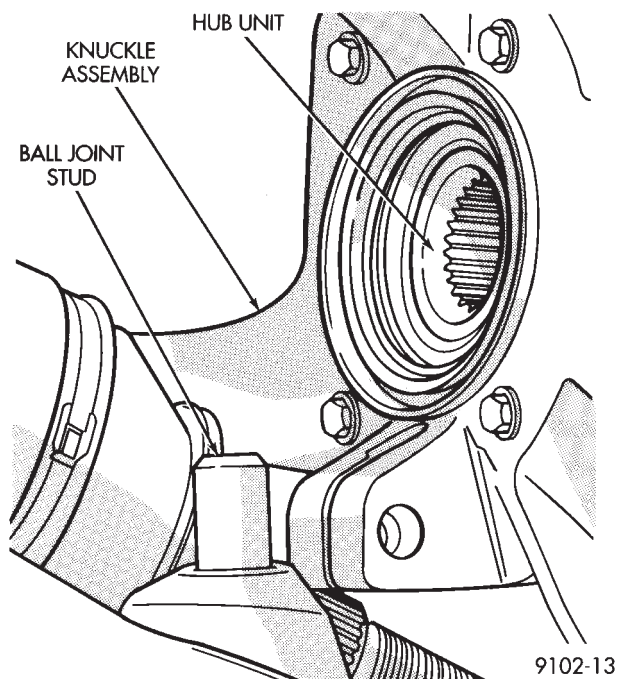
Remove or Install Steering Knuckle Clamp Bolt
